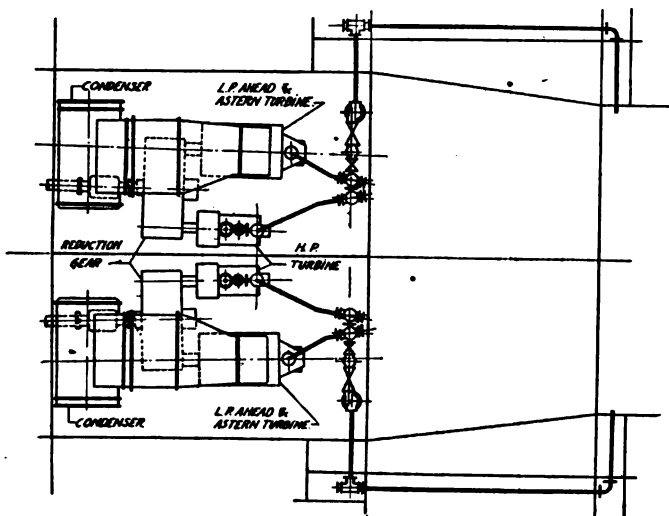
BATTLESHIP MACHINERY ARRANGEMENT; DIAGRAMMATIC PLAN OF TURBINE DRIVE WITH REDUCTION GEAR.
